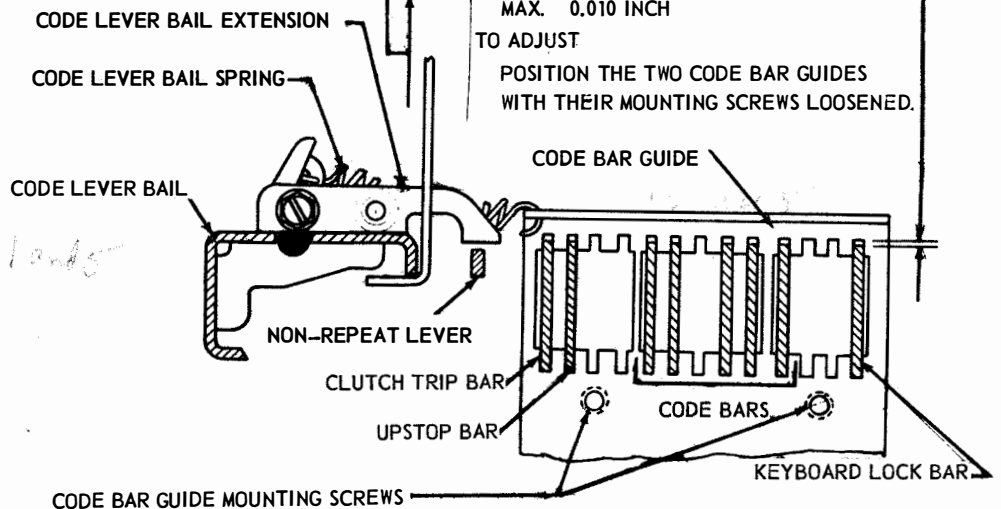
KEYBOARD, CODE BAR MECHANISM, LEFT SIDE VIEW
